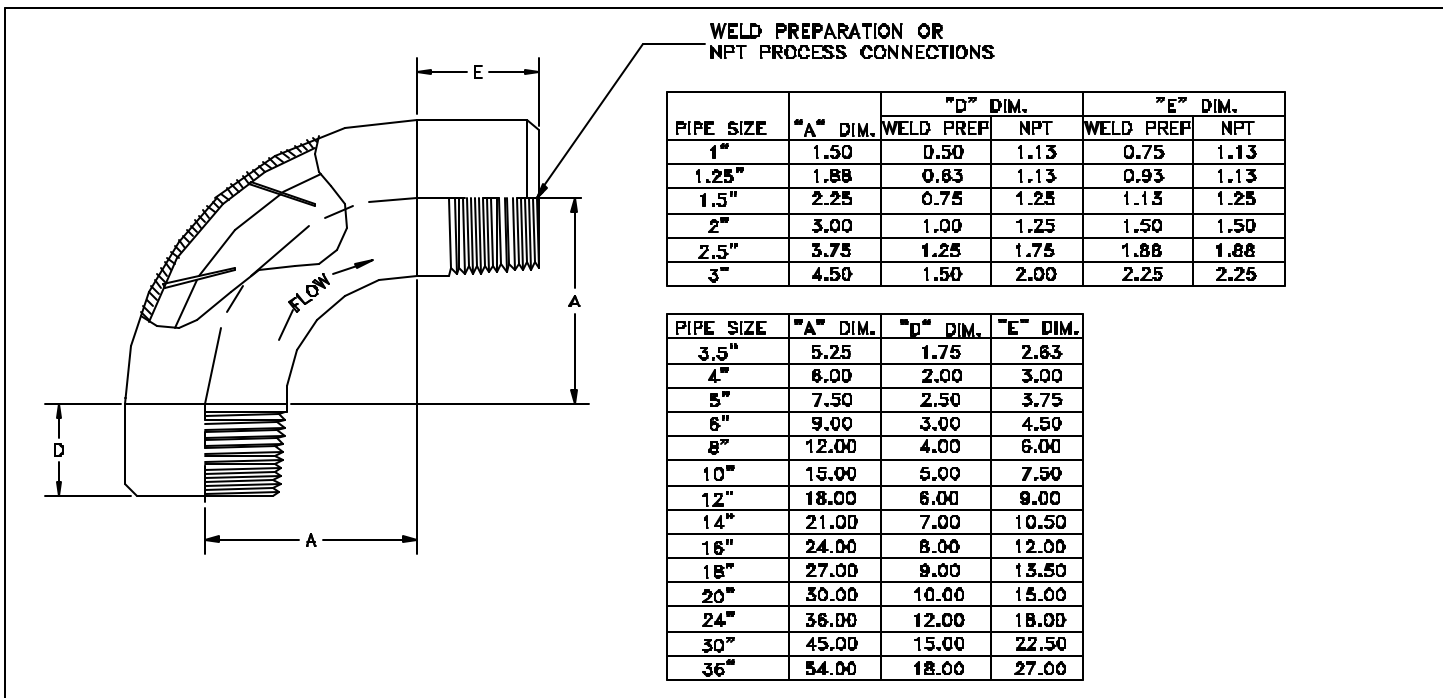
VEL with MNPT or Weld Preparation Process Connections
